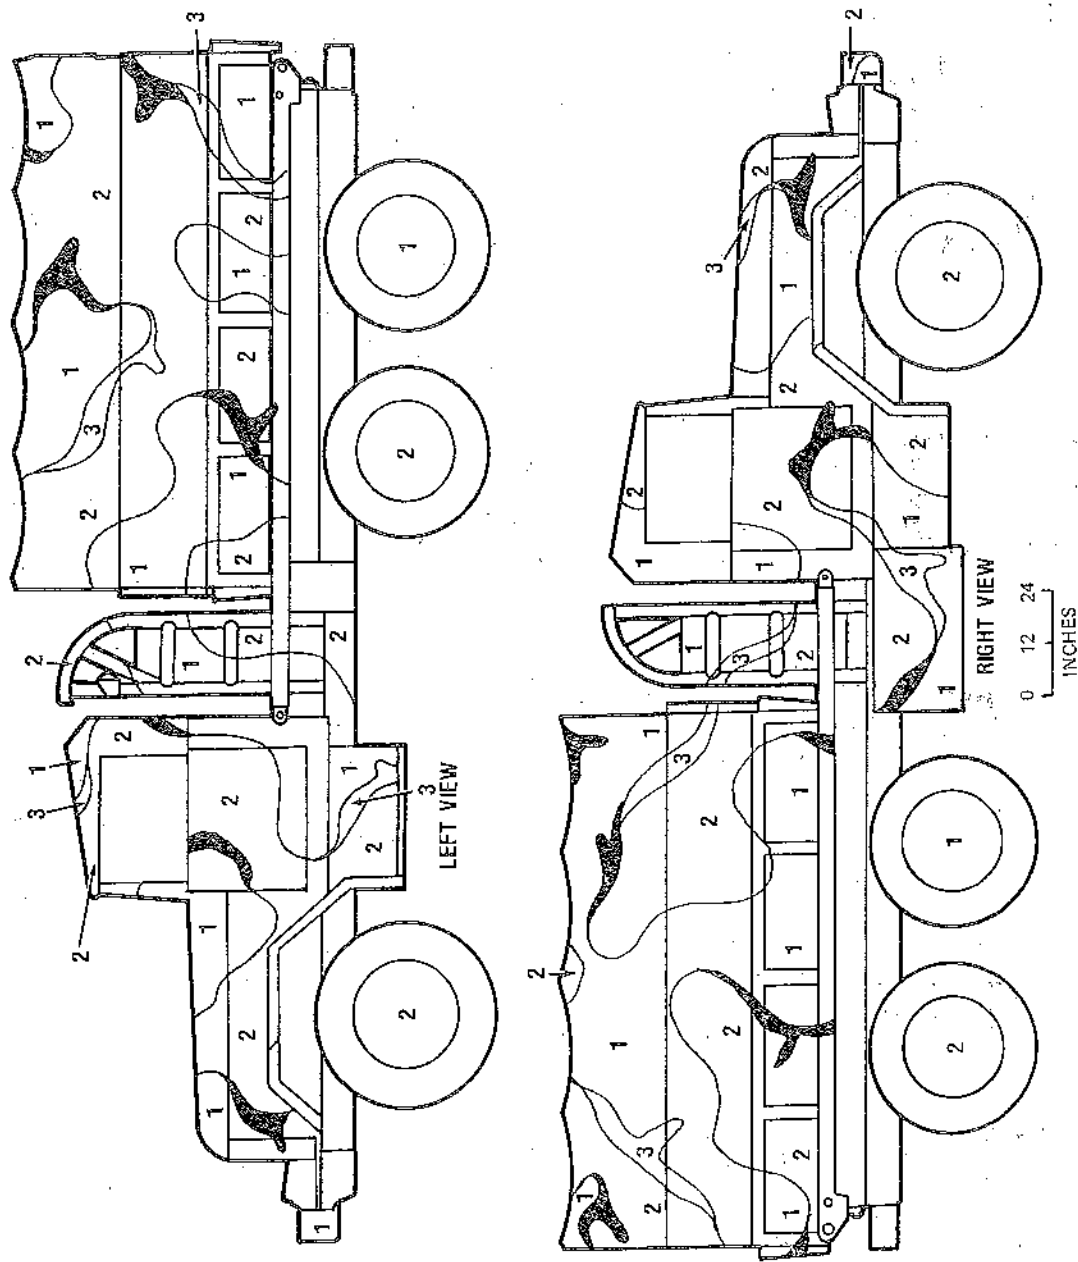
Truck, pipeline construction: 2½-ton, M756. (2 of 2).
